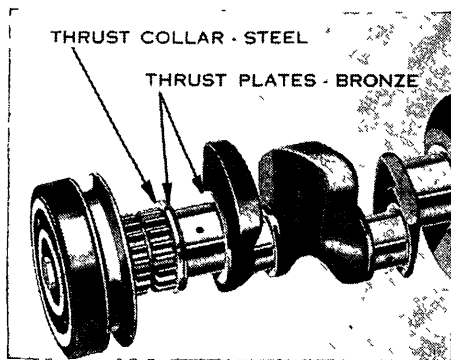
Crankshaft end play adjustment, 1935-50 L-Head
